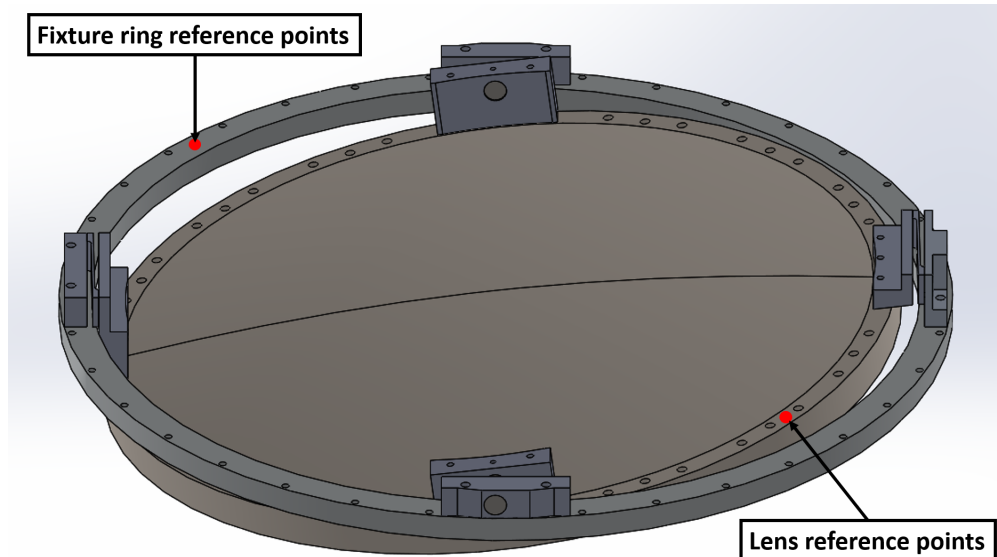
CAD image of the field lens and its fixture ring, showing in *red* the reference points to measure with the CMM for measurement of tilt.
